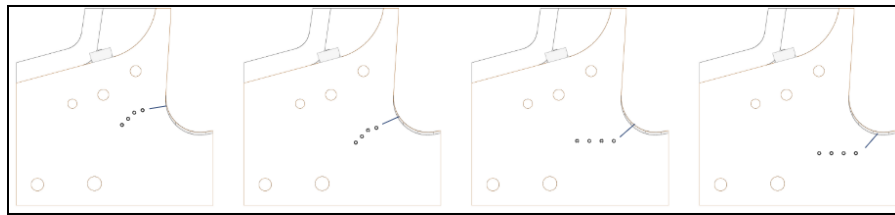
R&R test specimens (crack type 1 / crack type 2)
